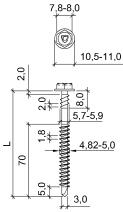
DBT(A)4.8 Screw for fixing in metal sheets
